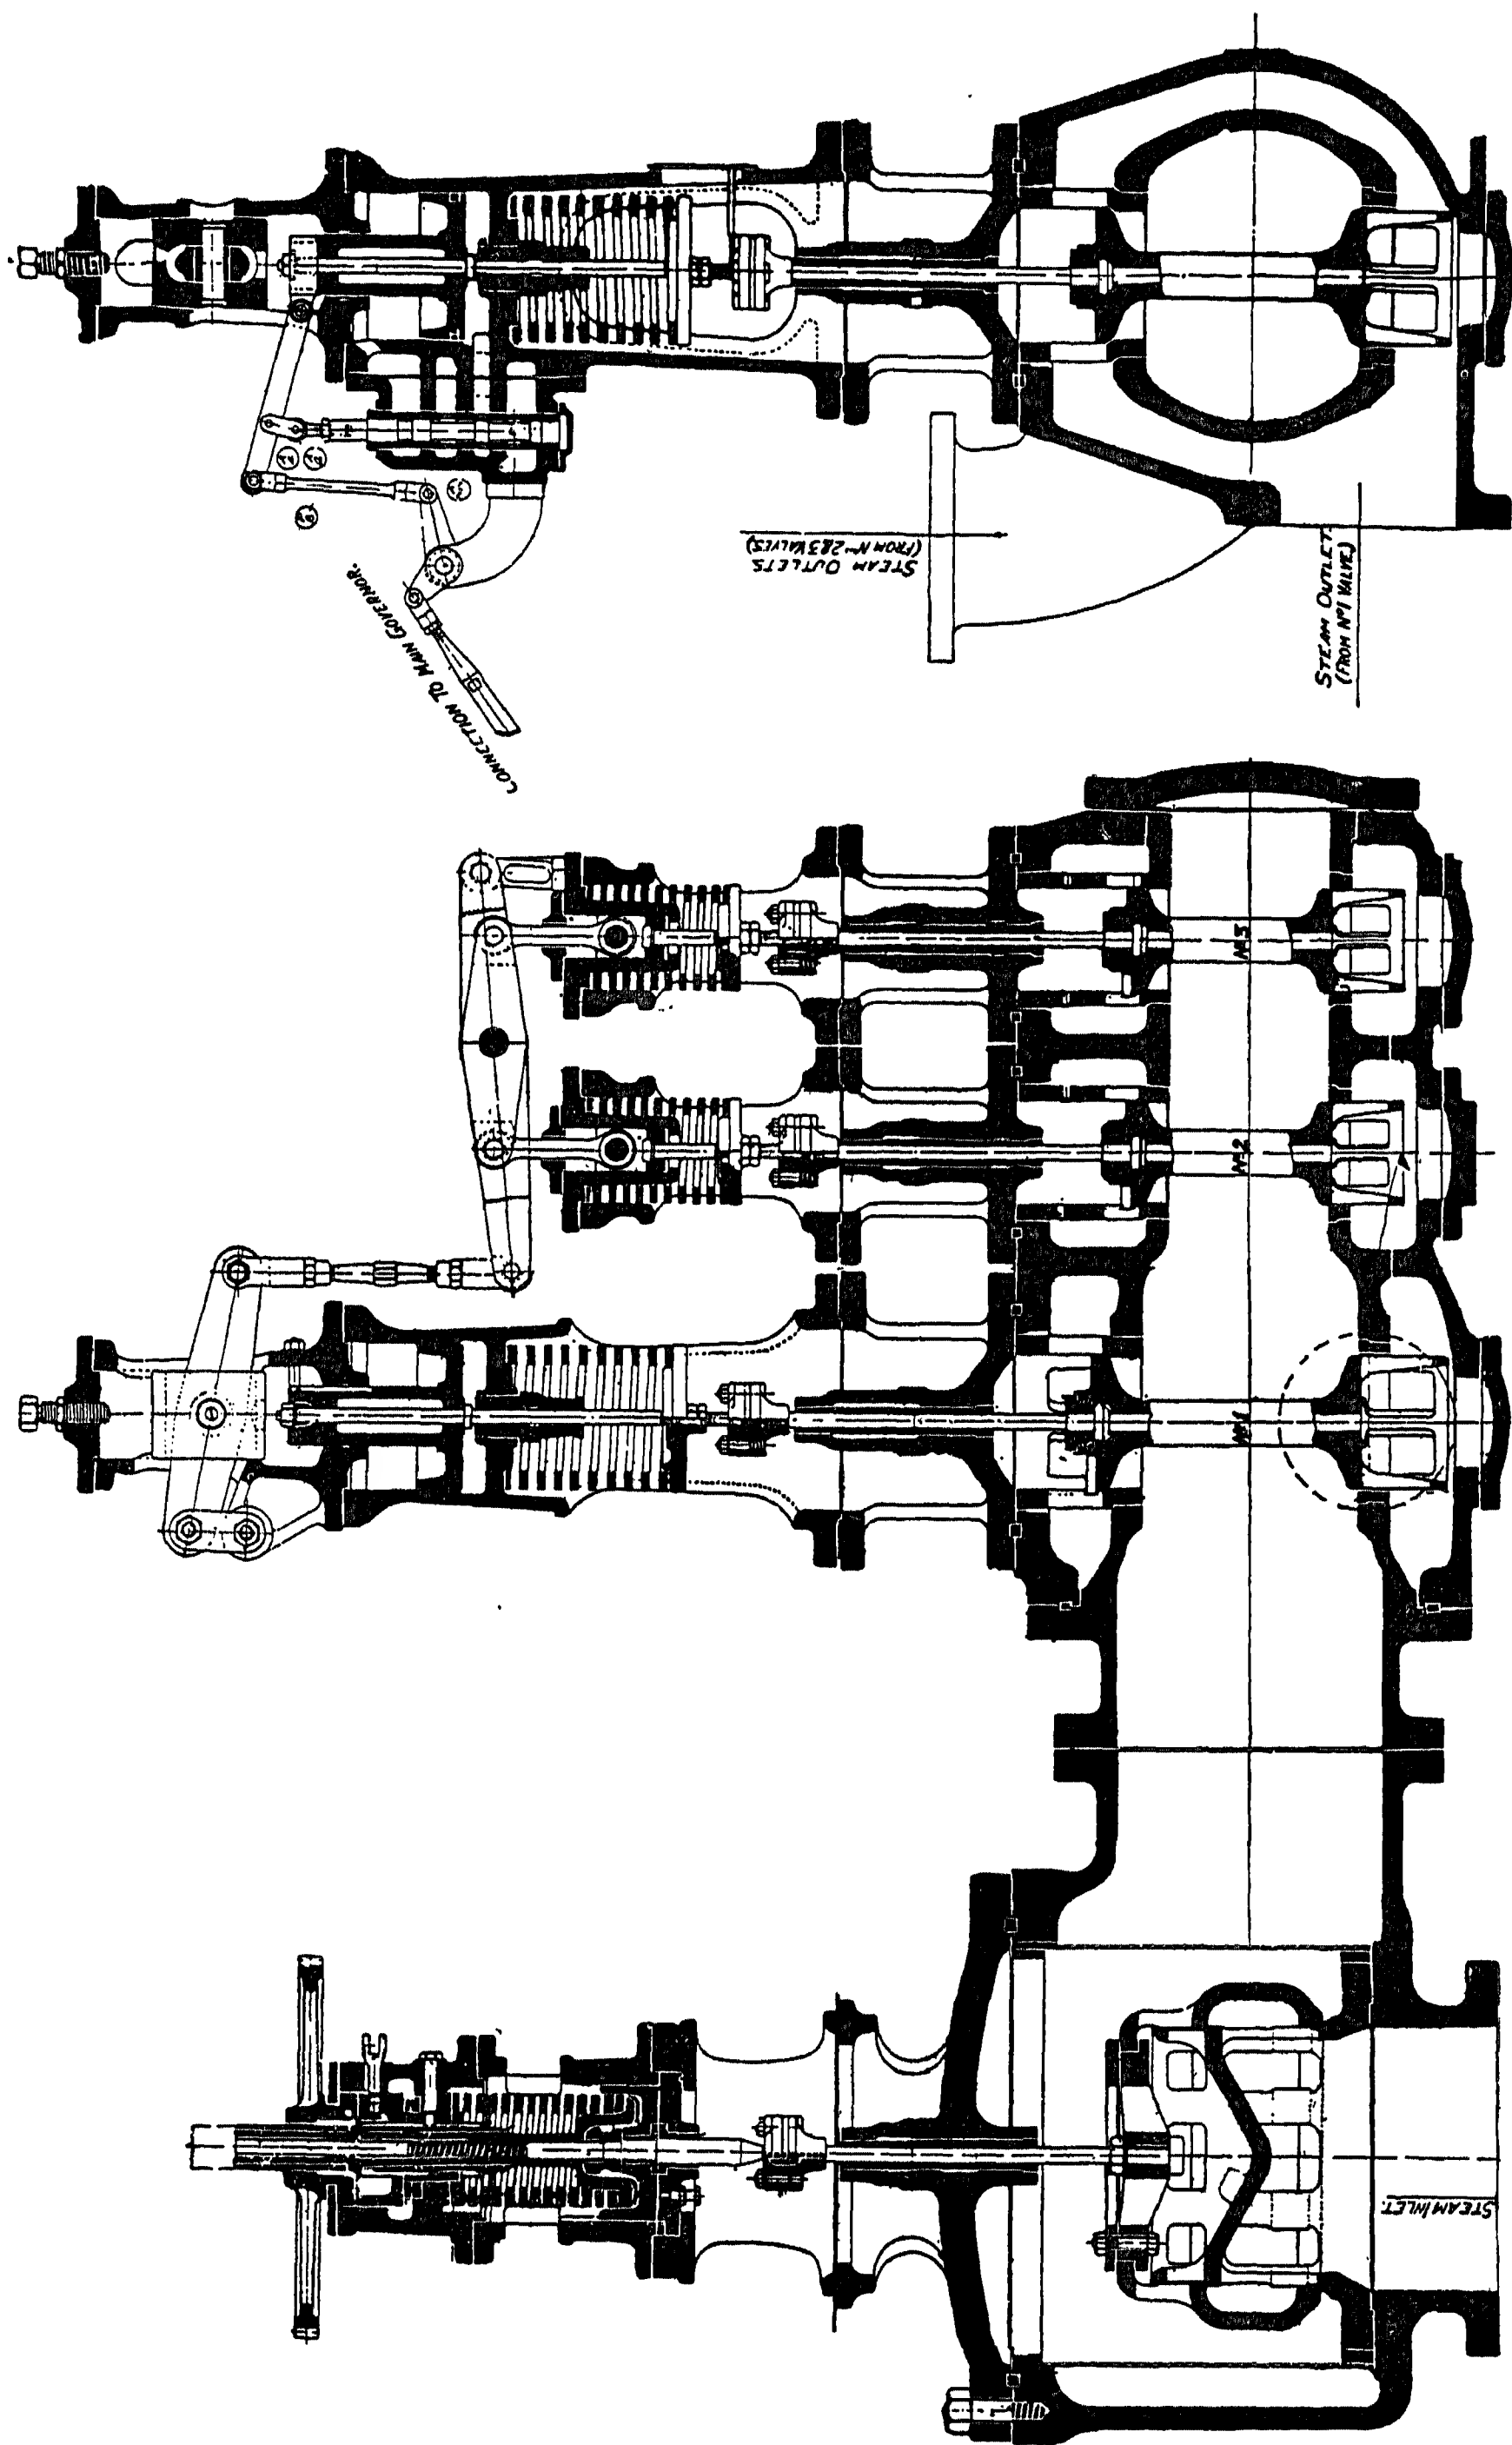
Sectional Drawing of Steam Chest for large Metropolitan-Vickers Steam Turbine
